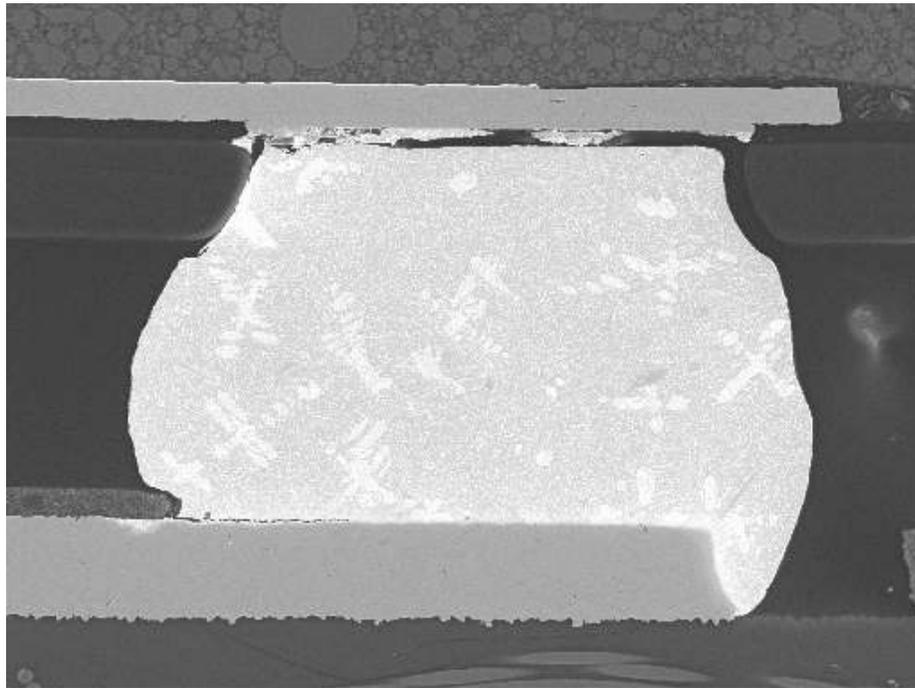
Failure mechanism showing failed solder joint at package interface [Lall 2004]
